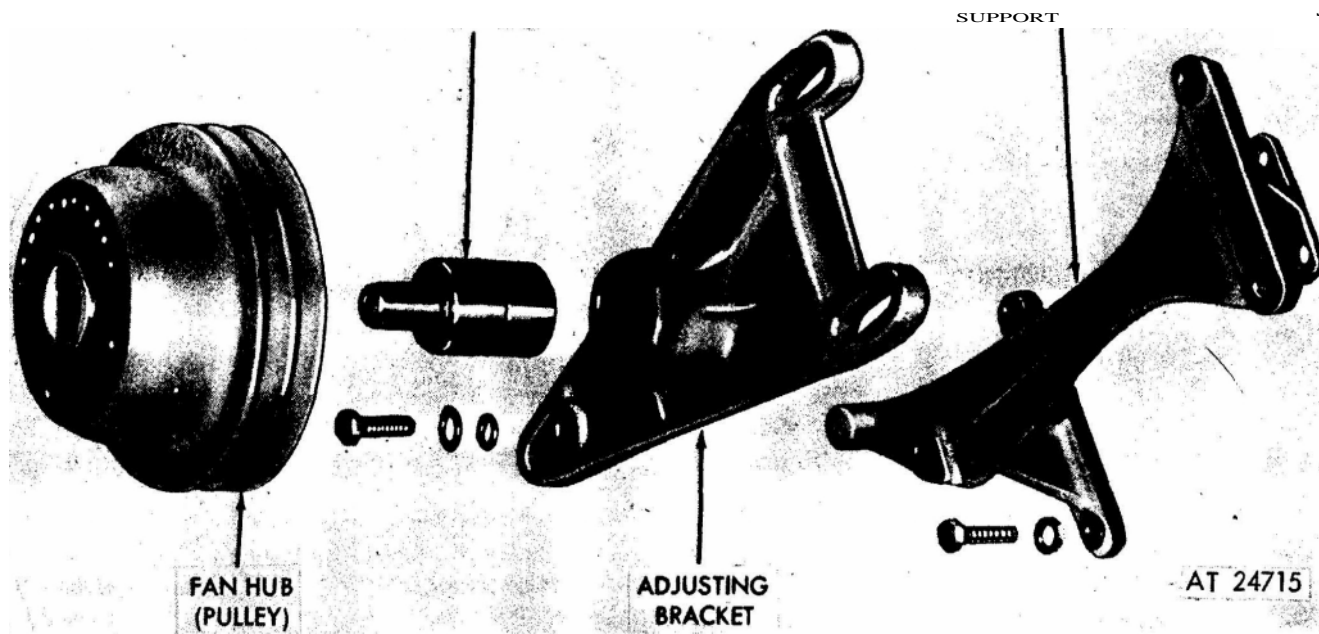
Typical fan hub and adjusting bracket details and relative location of parts (in-line engine)
